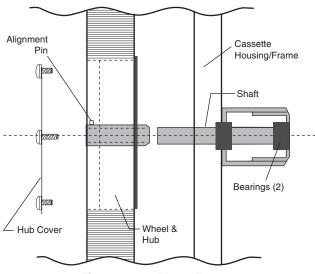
62M040 Energy Transfer Wheel Assembly
